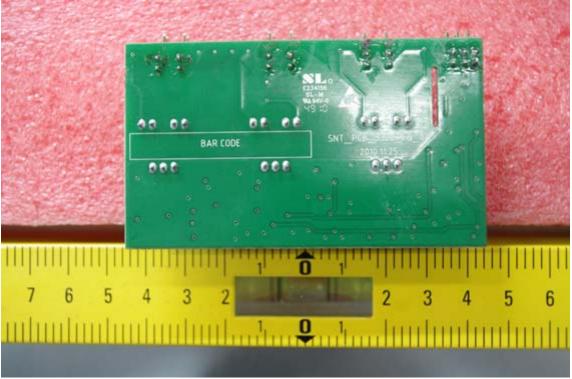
Board SNT_PCB_3320_FQ, traces side view
